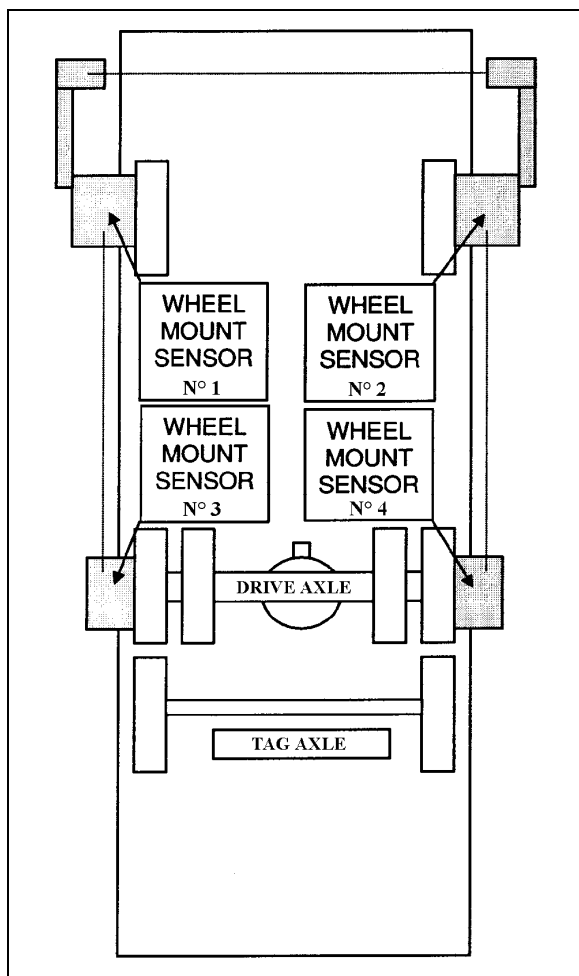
FRONT & DRIVE AXLE ALIGNMENT 11025
